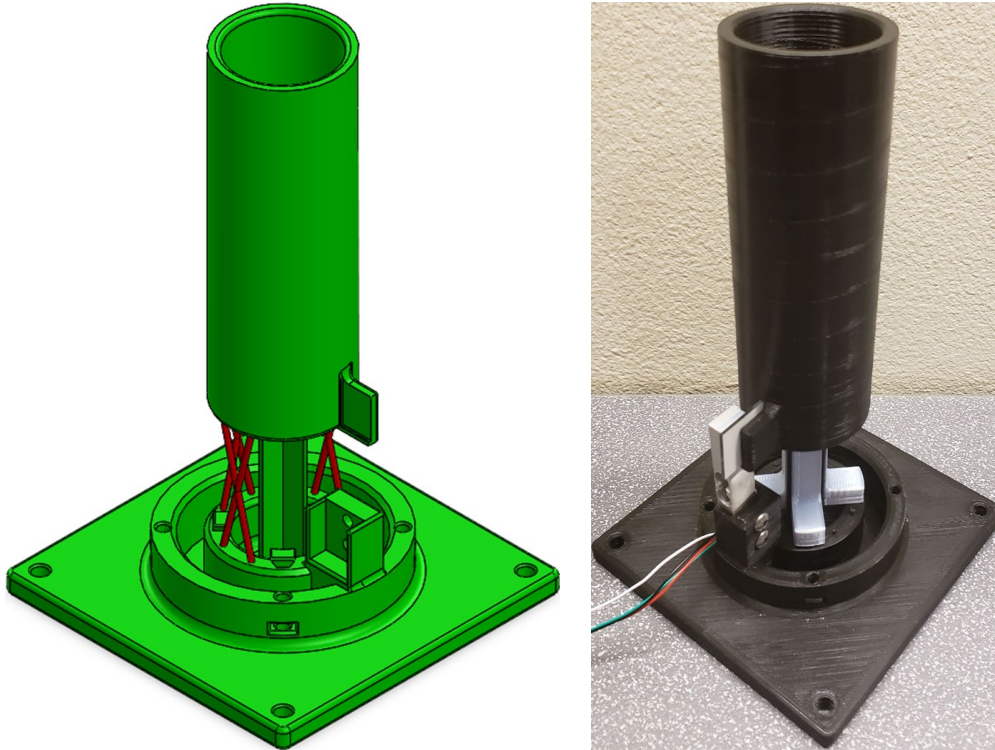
CAD of the version 2 cup with the additional supports for printing the cup shown in red and the 3D printed prototype of the cup, flexure, and base with the locks, loadcell, mirror, and nuts in place and with the supports removed.
